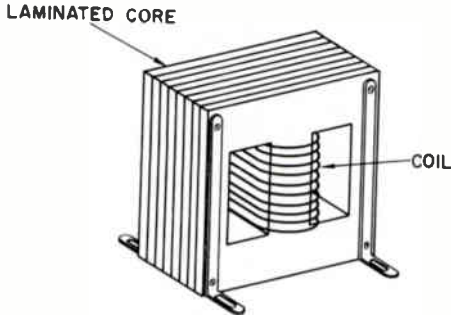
Iron cores are frequently made of thin sheets of metal bolted together.
